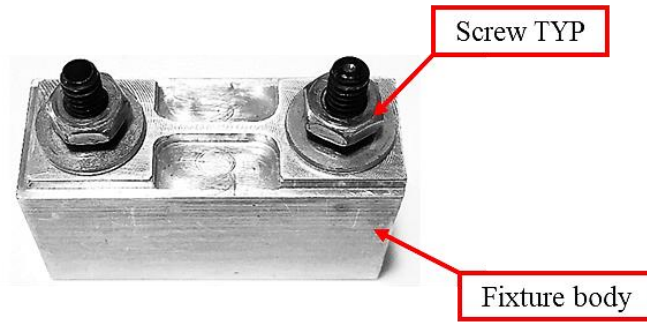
The custom fixture for machining dog-bone tension specimens.
